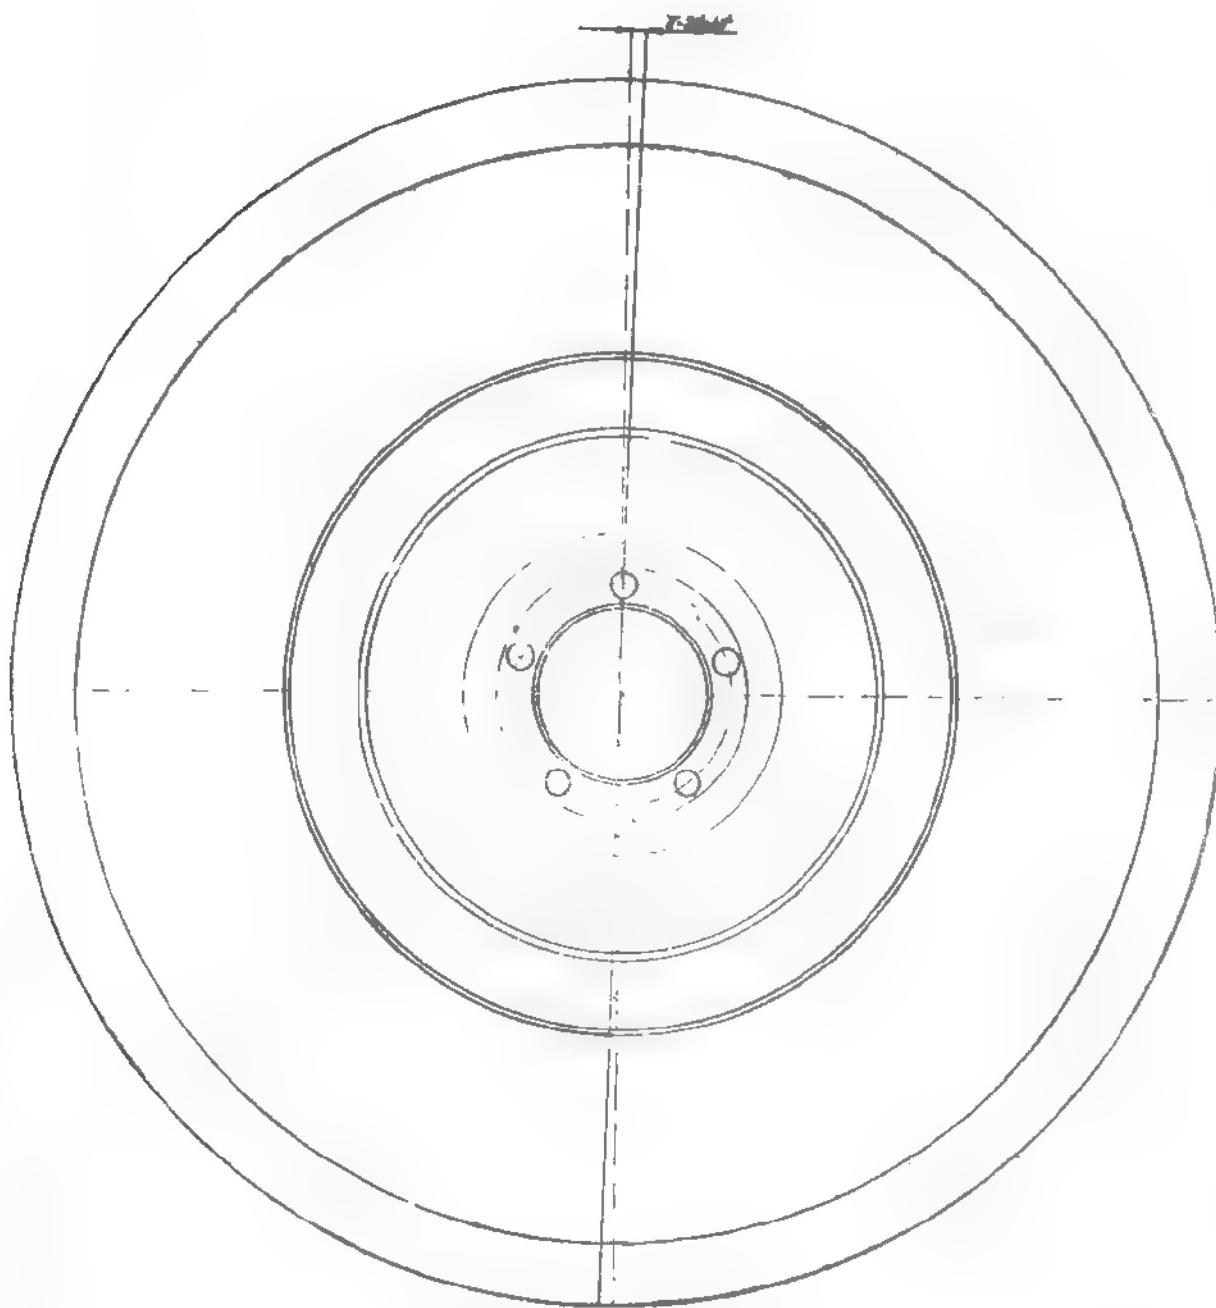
STEERING WHEEL CASTER ANGLE
